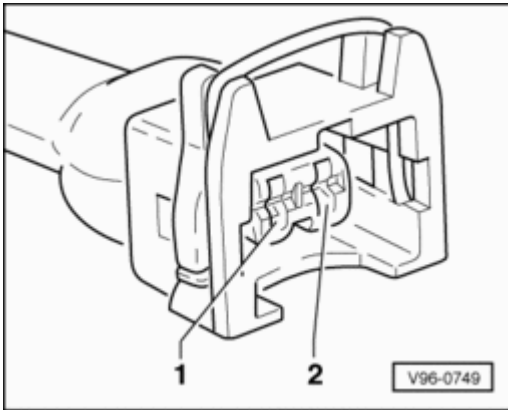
Identifying 2-Pin Electrical Connector & Terminals
